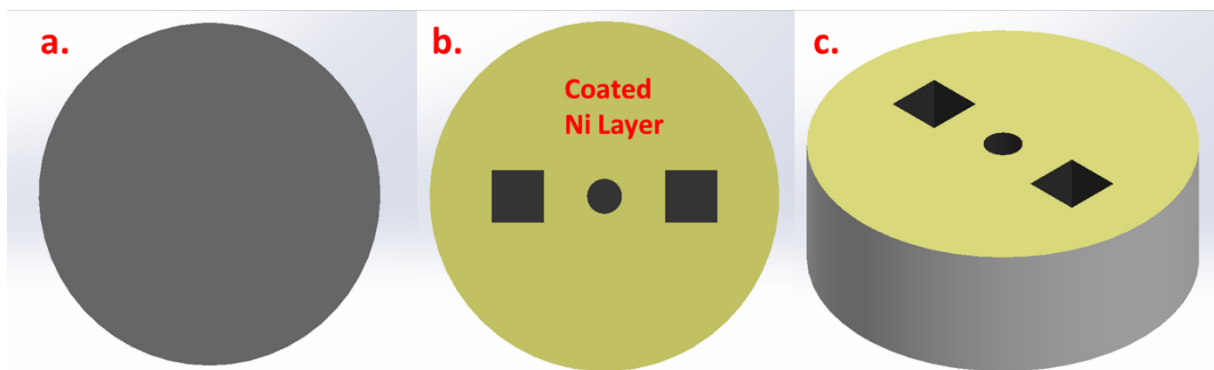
(a) Front Side of the Rotor Pad; (b) Back Side of the Rotor Pad; (c) 3D View of the Rotor Pad
